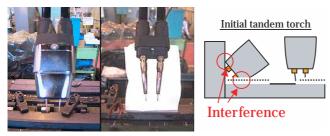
Initial Tandem Torch and Welding Motion
